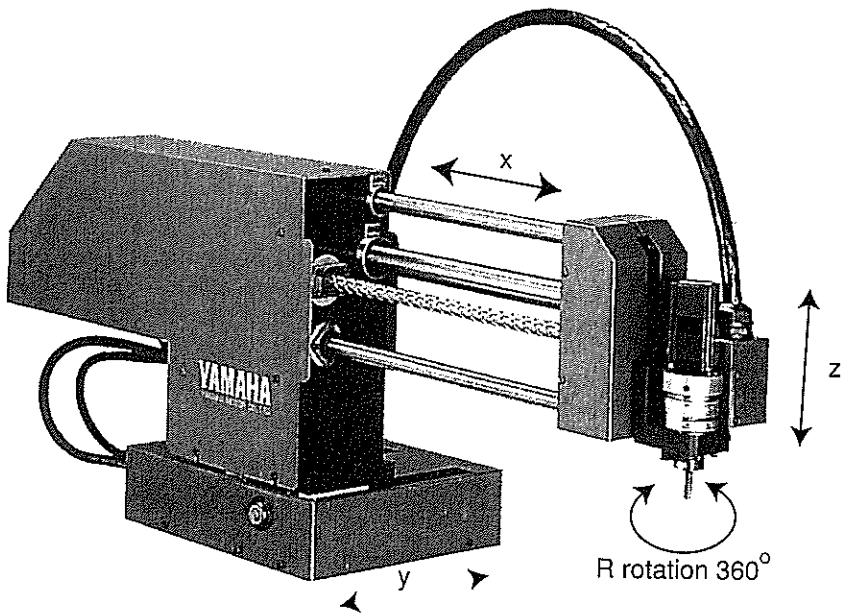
The Yamaha model YP304A Pick & Place-type robot is a four-axis unit that uses actuator stroke to position the end-of-arm tooling. (Courtesy of Yamaha Robotics, Inc.)
